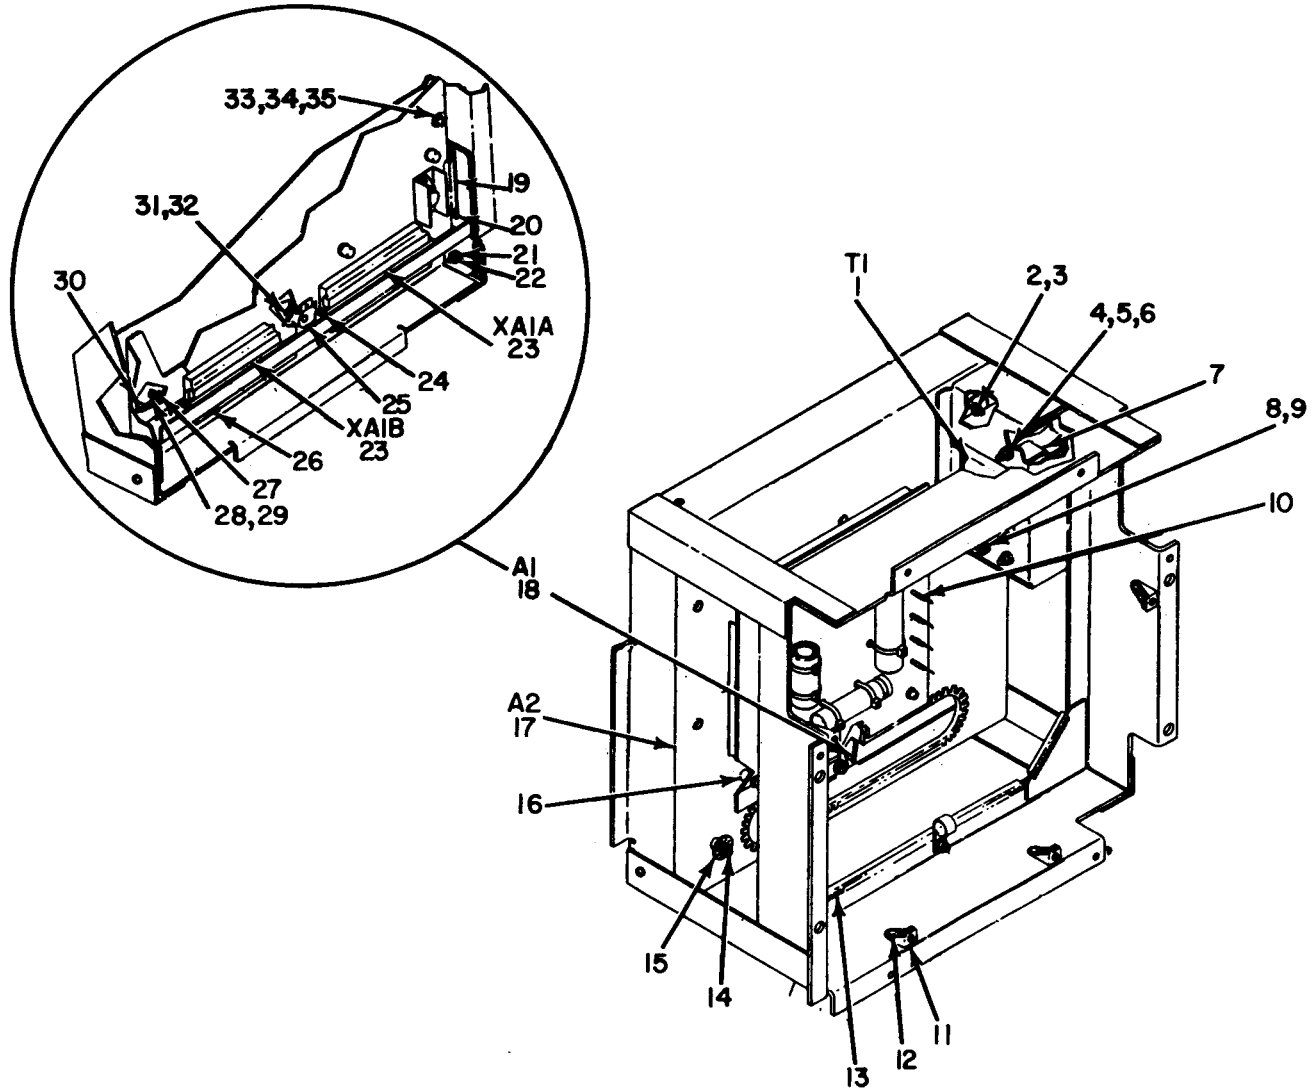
Panel Assembly, Front, Parts Breakdown (Sheet 2 of 2).
